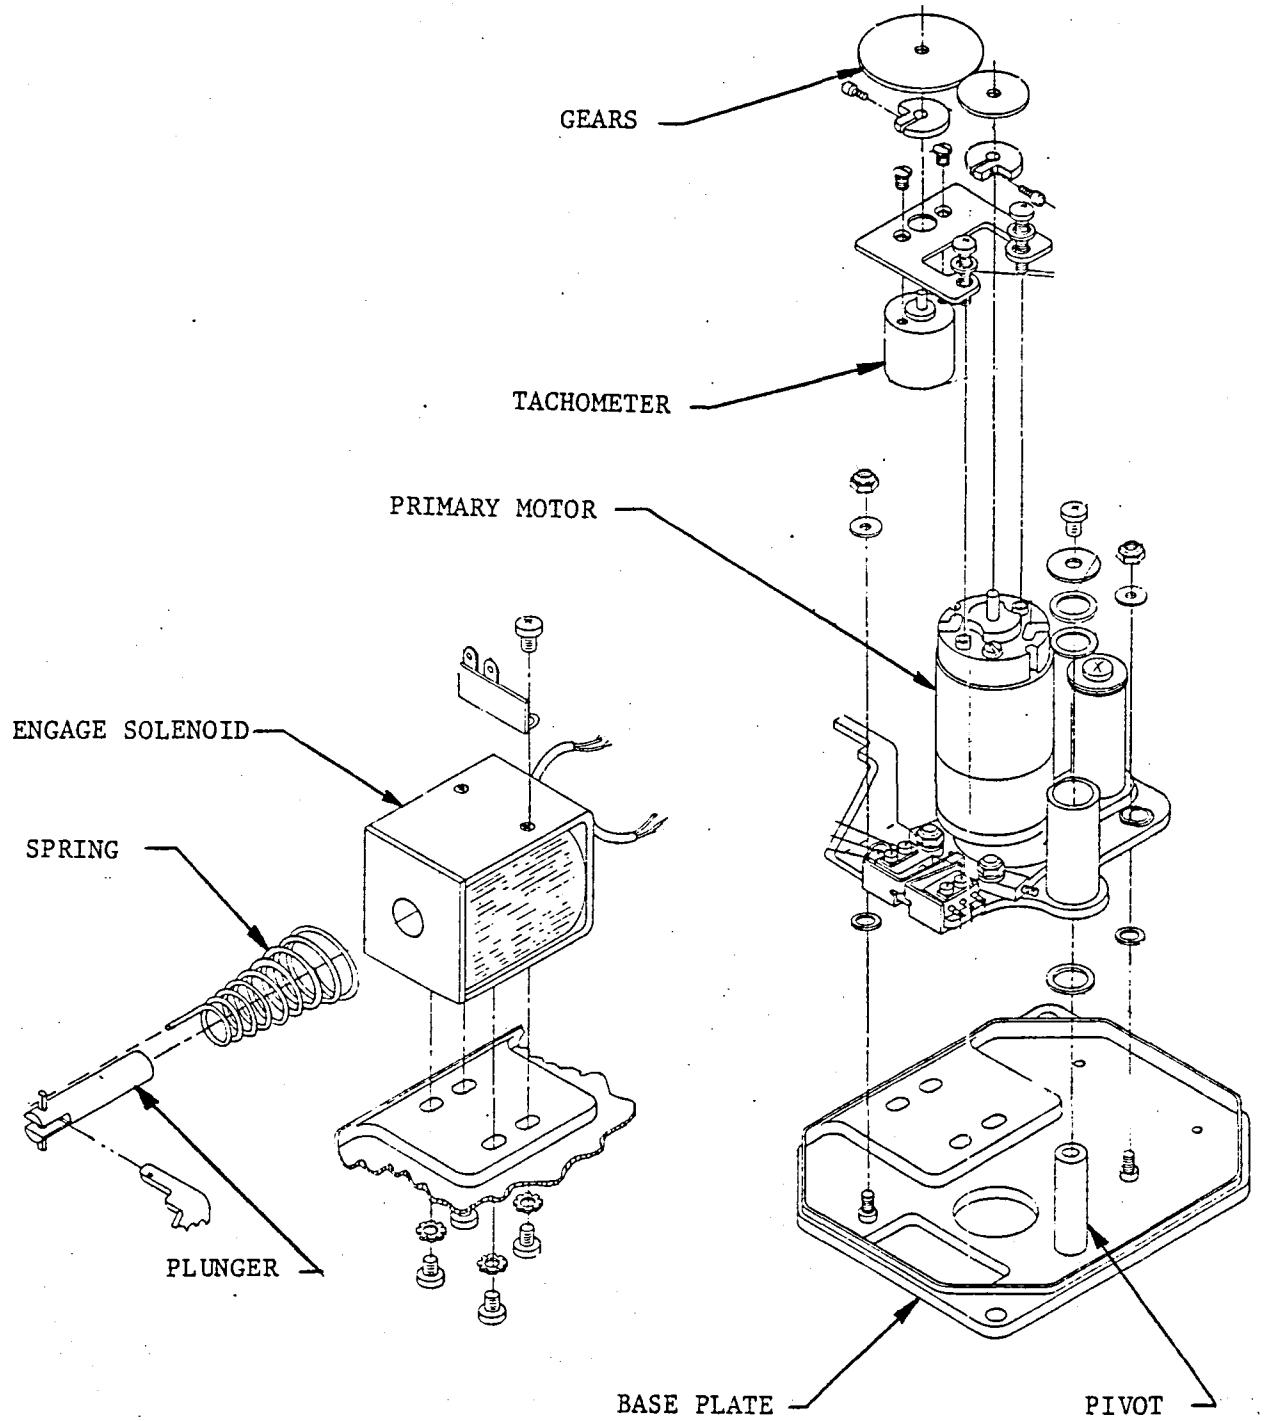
Exploded view of electromechanical servo (Reference 18).
